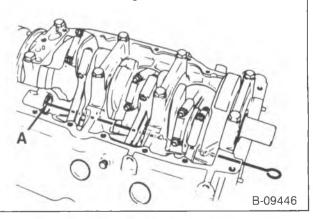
Checking Camshaft Bearing Oil Hole Alignment (Typical)
